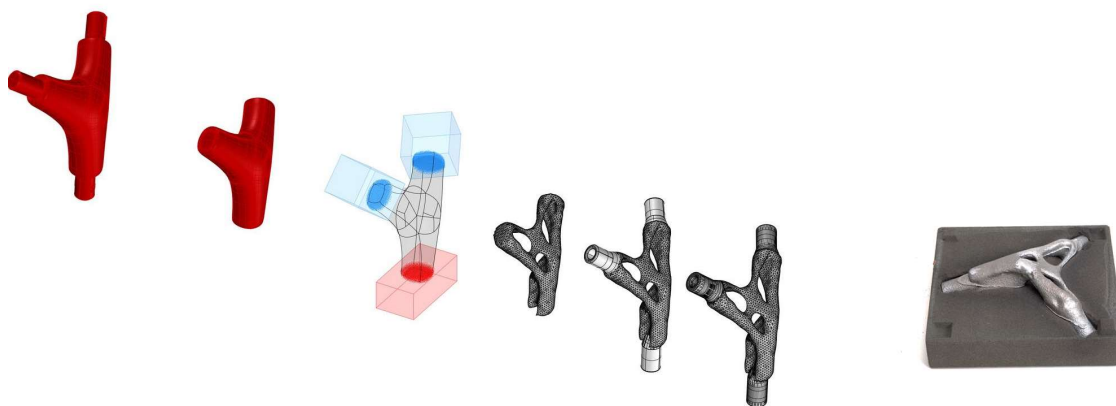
Example of the design process and fabrication of a custom-made cast metal node using 3D-Printing techniques [4]
